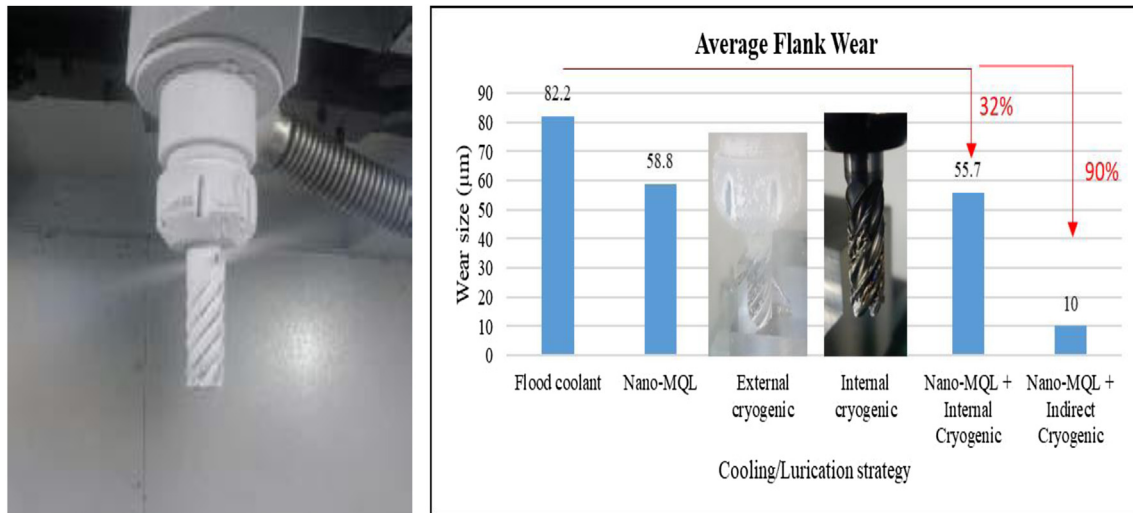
(a) MQL + indirect machining setup, (b) Tool wear with respect to different cooling system [29]
